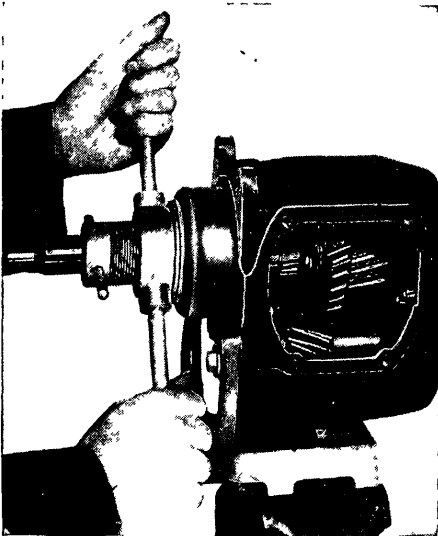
R moving main drive gear and bearing with puller. 1937-52
